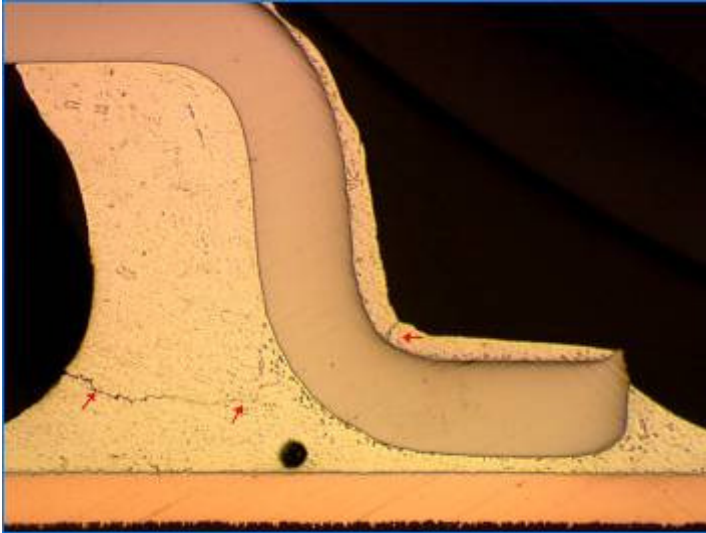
cross section, SN79, U12, right lead solder partial crack, 100x
